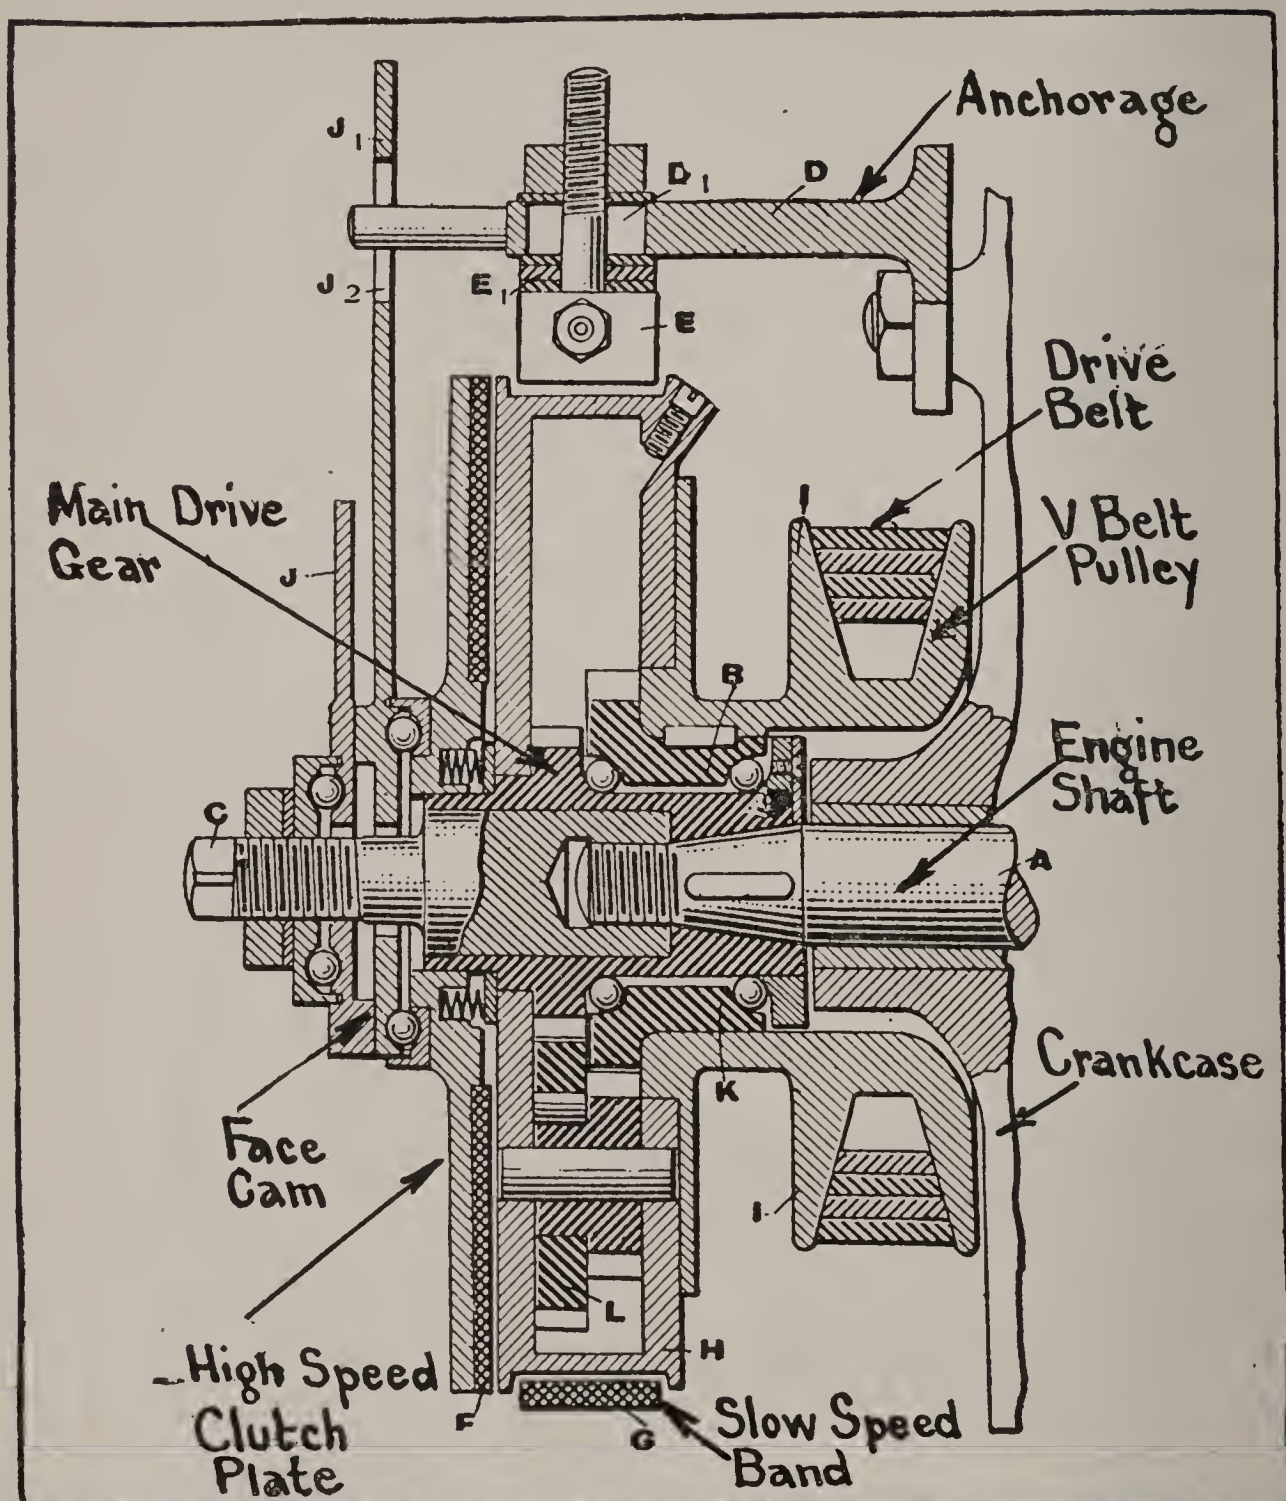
Sectional View of Typical Planetary Two Speed Gear, Adapted for Application to Engine Shaft.
